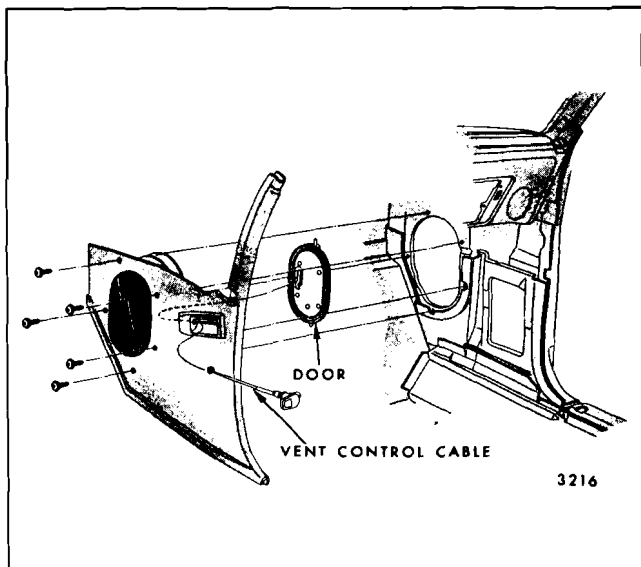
Shroud Side Finishing Panel - "F" Styles
